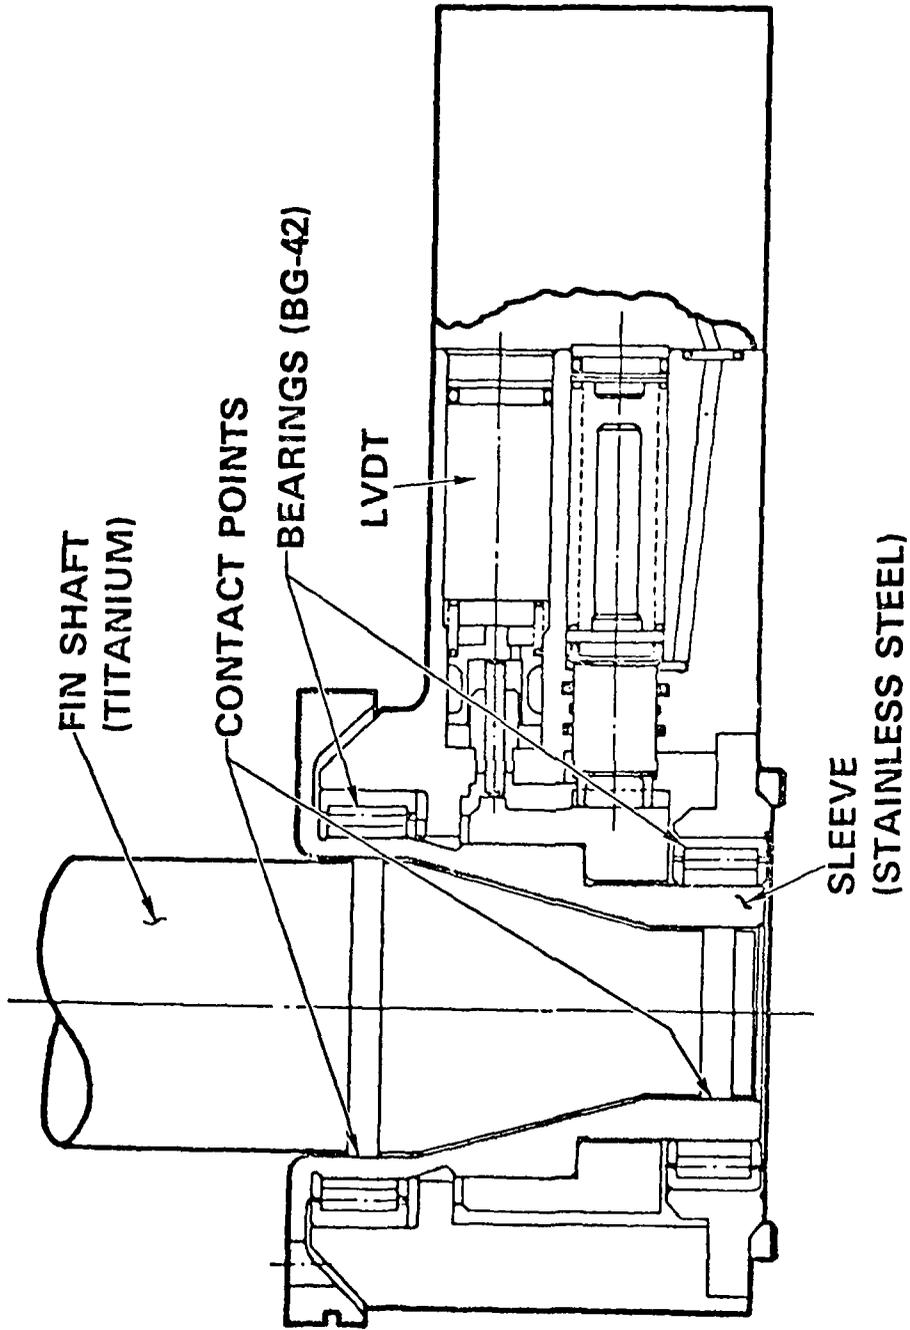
ASALM ACTUATOR DESIGN-BEARING DETAIL
